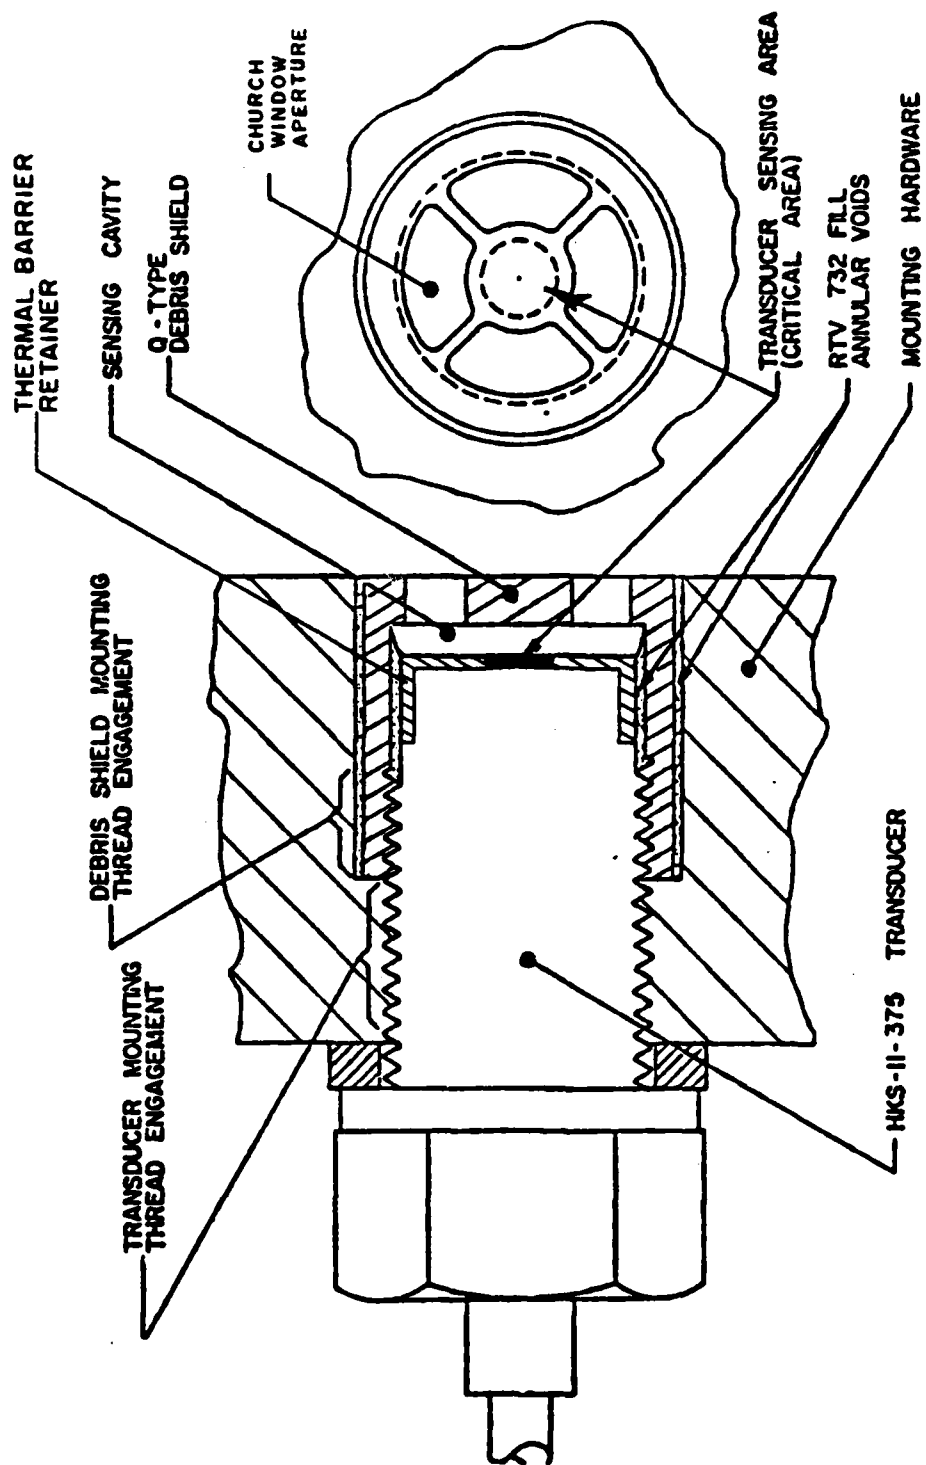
DEBRIS SHIELD SCHEME FOR HEAD-ON SENSING
